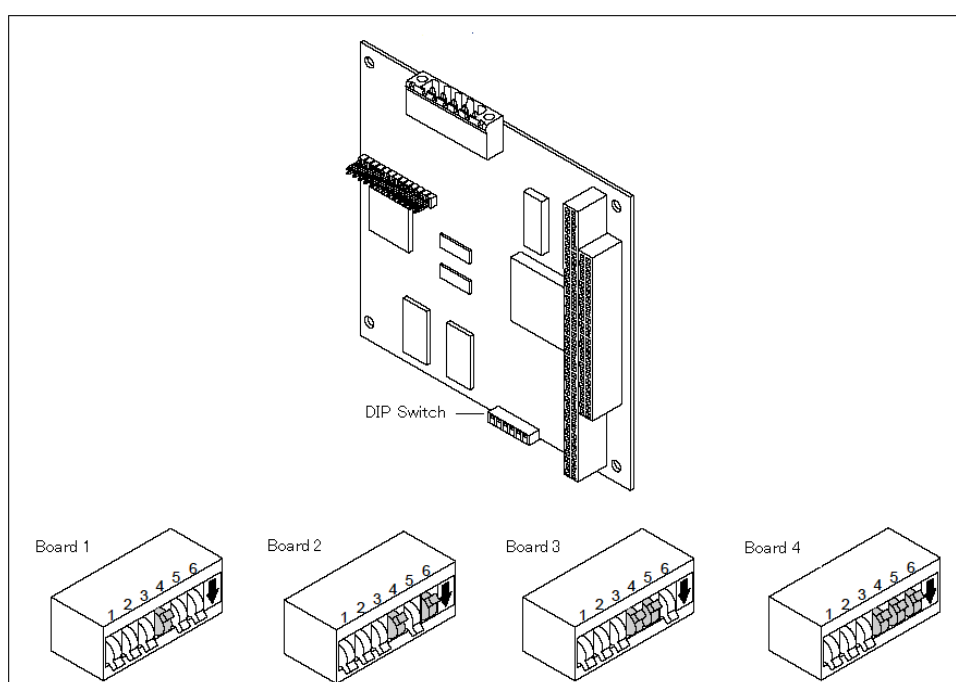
(a) Setting of DIP switch for DN3 board
